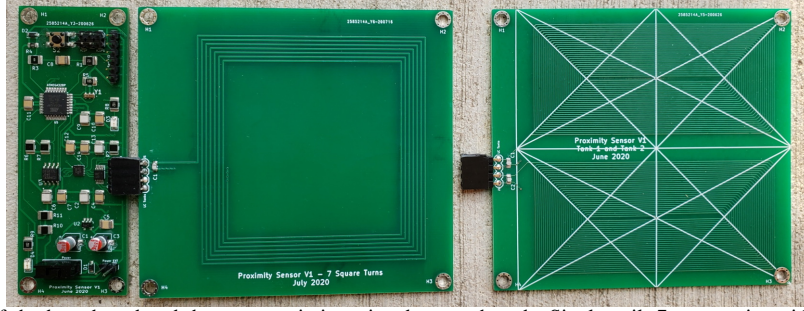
Hardware prototypes of the base board and the two proximity printed sensor boards. Single coil: 7 turns, wire width 0.508 mm, wire spacing 0.762 mm. Dual coils: 14 turns, wire width 0.254 mm, wire spacing 0.381 mm. Complete design files can be found at [14].
